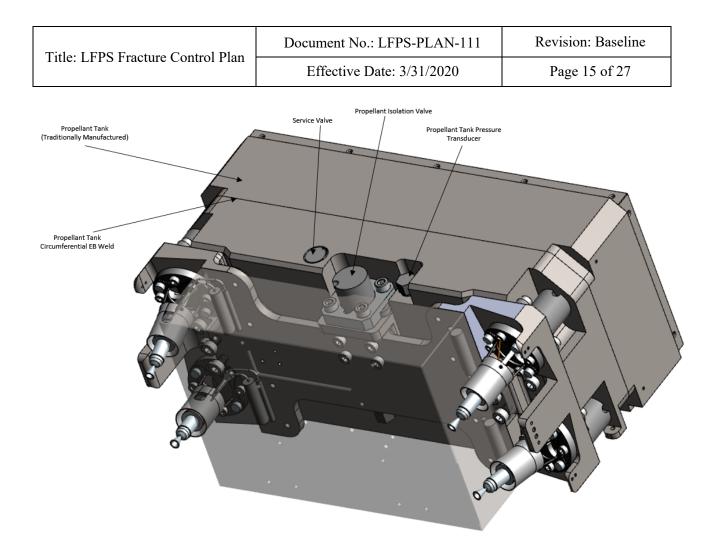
Propulsion System Fracture Critical Components and Welds
